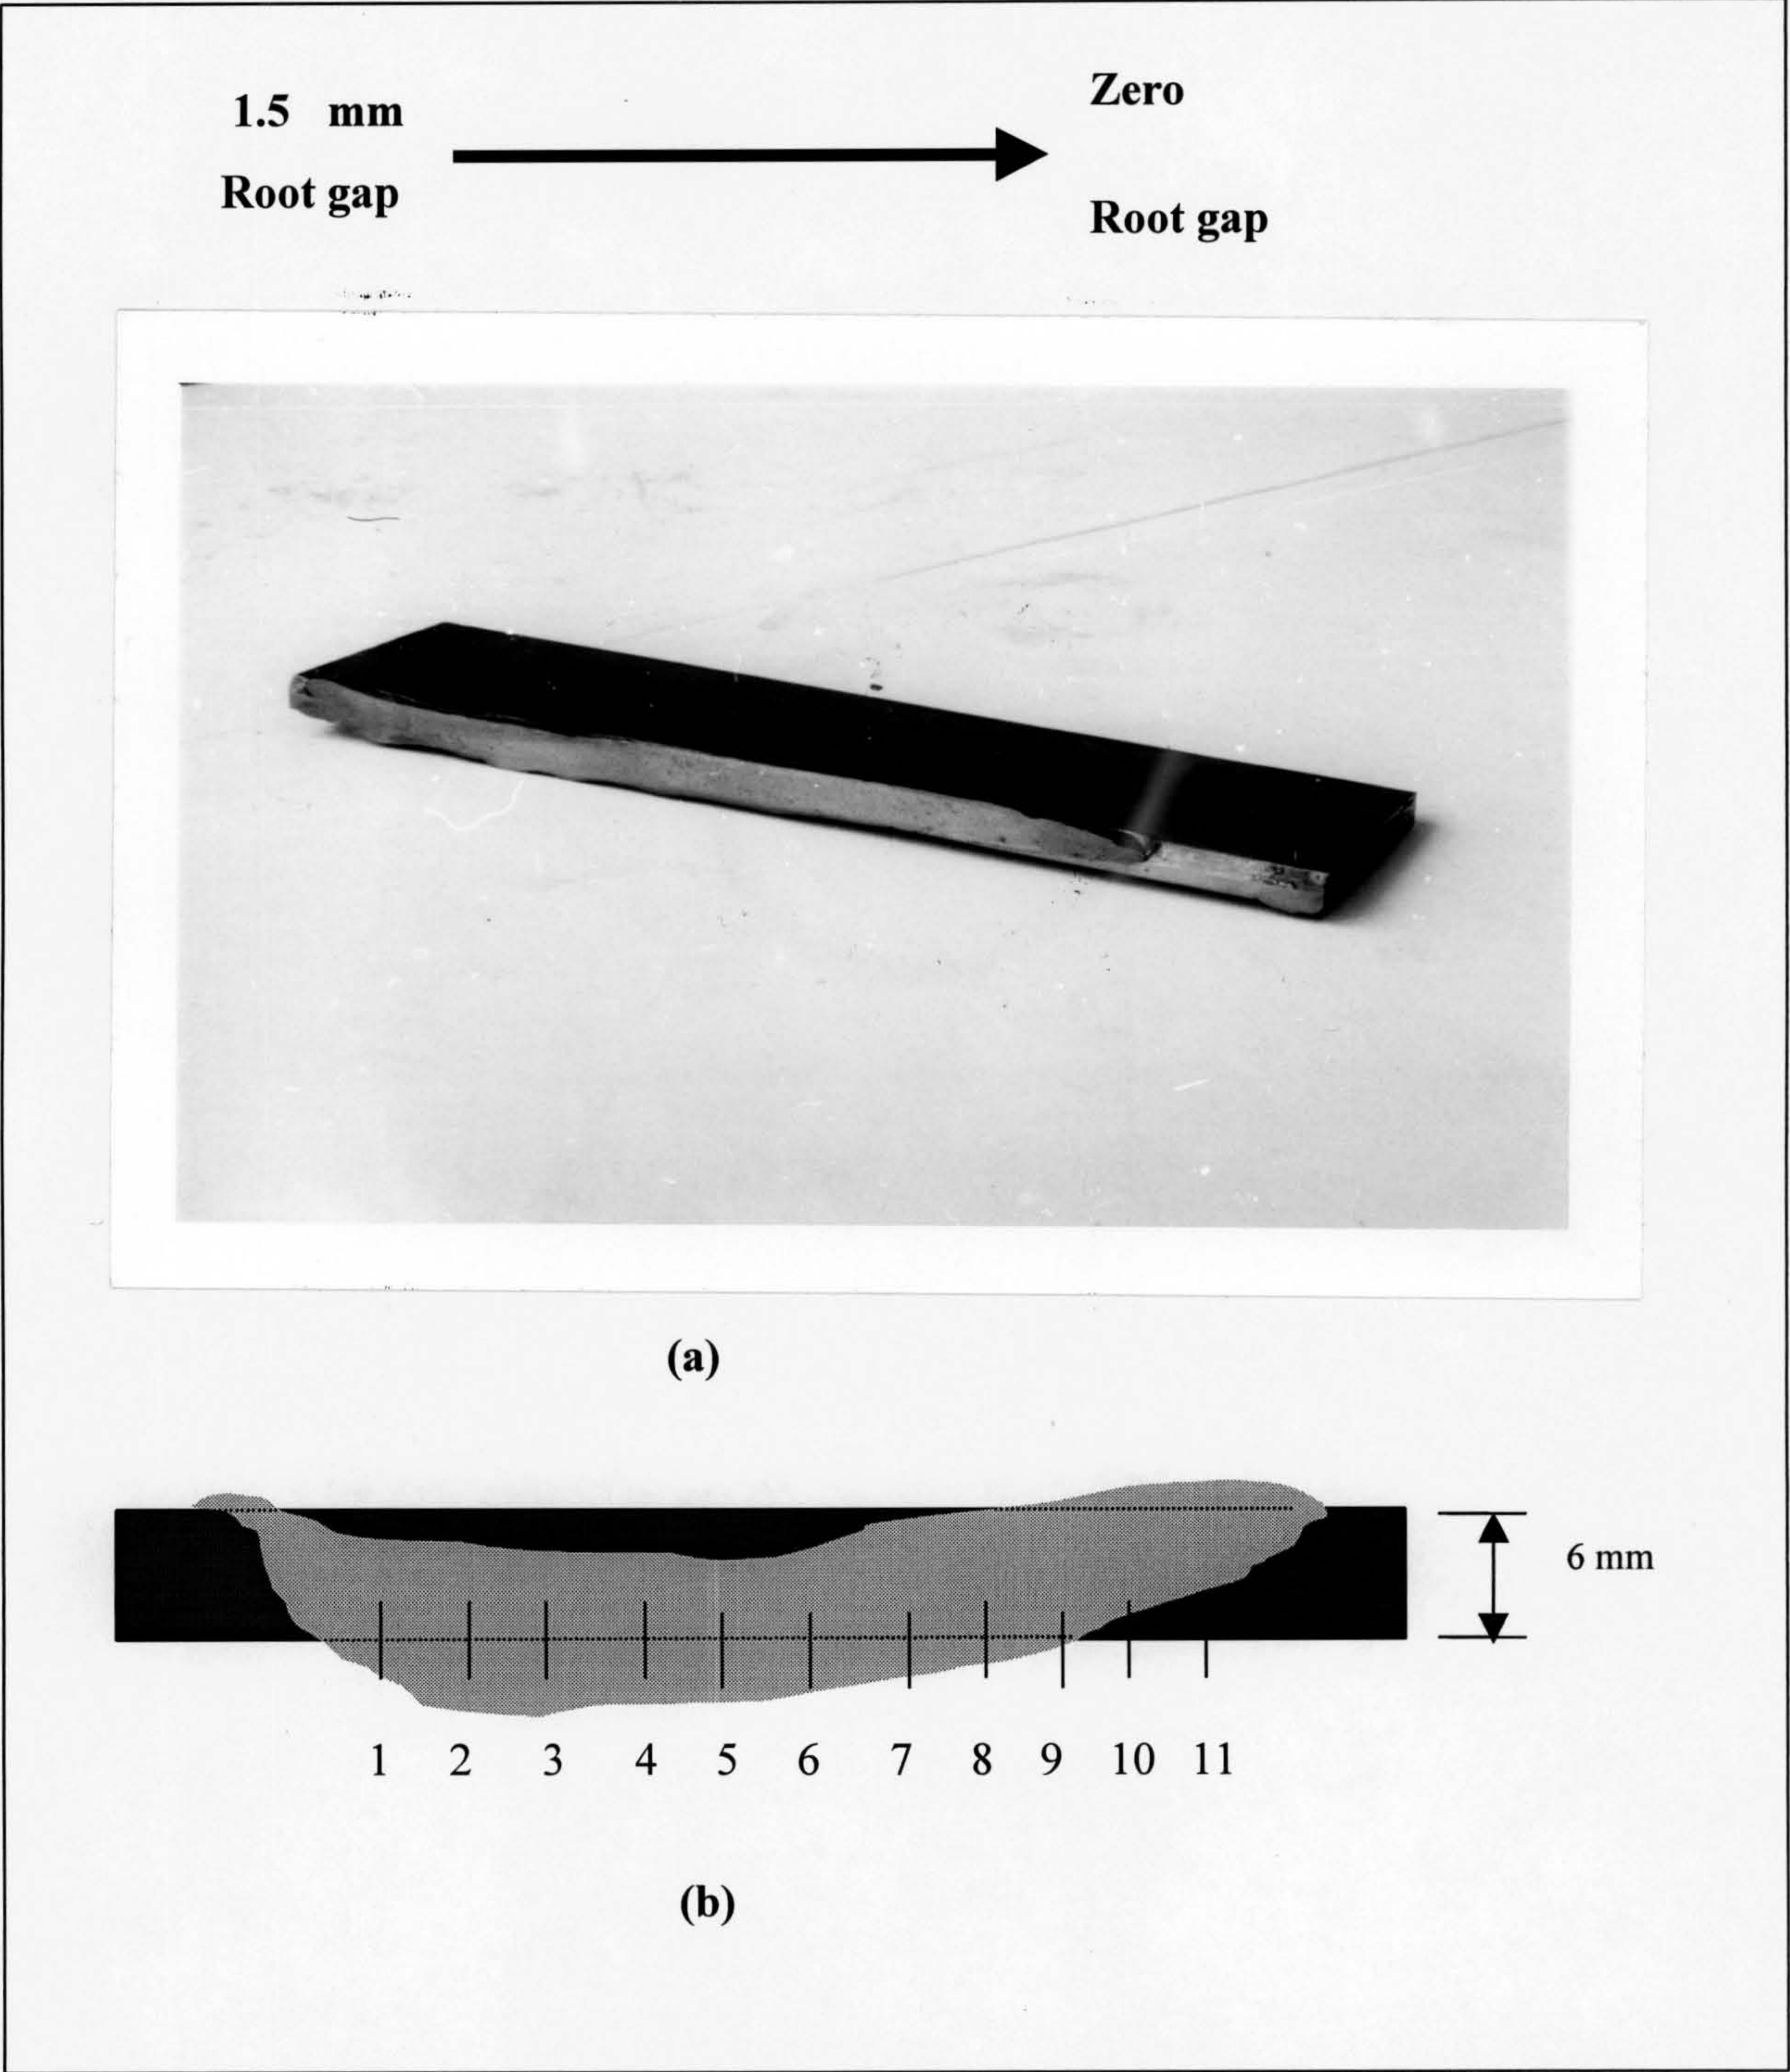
cross section of weld with 0-1.5mm root gap.
